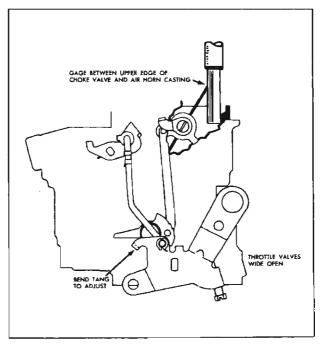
B-19 Adjust Unloader (Center Carburetor Only)
